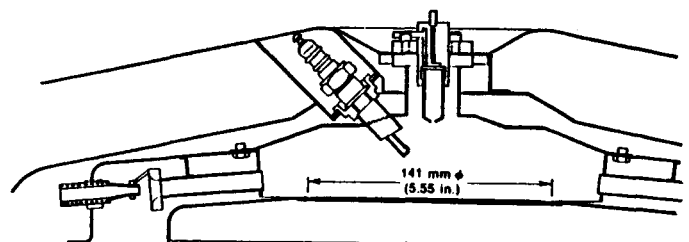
Ribbon CGR Combustor with Internal Turbulator and Mixing Holes Removed
